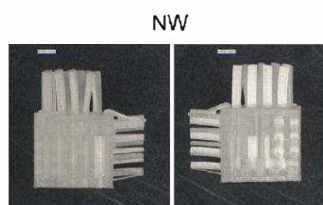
Test specimen on position NW viewed from (left) and on (right) the PD/BD plane with both horizontal (length 2 mm) and vertical thin walls (length 3 mm)
